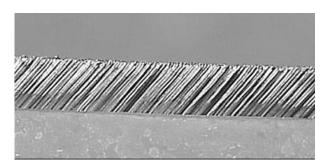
7EA Gas-turbine high-pressure packing brush seal in good condition after 22,000 h of operation.
